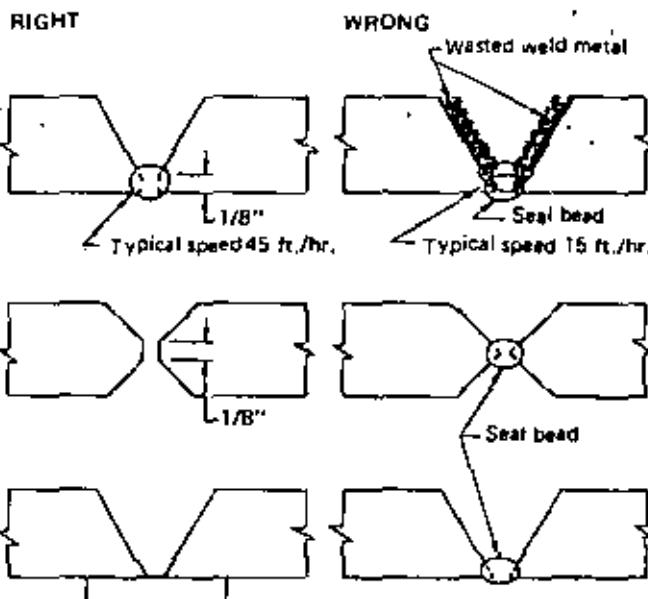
Proper joint geometry for thick-plate welding.
